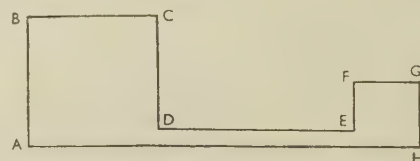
Extrusion of Non-Uniform Cross-Section.
